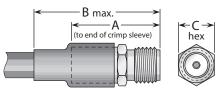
(Crimp type, shown with supplied heat-shrink tubing)
